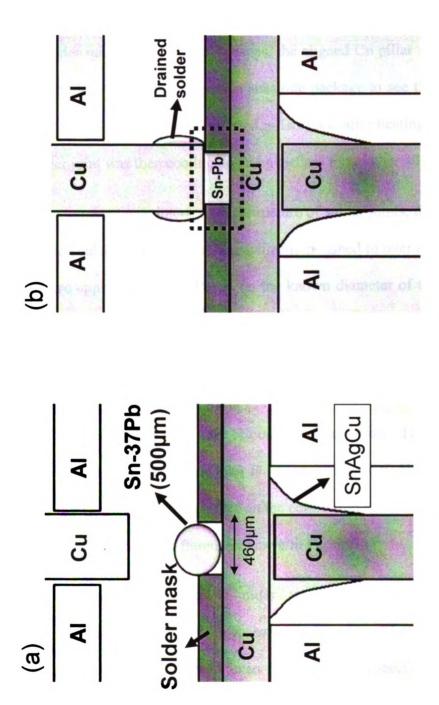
Schematics drawing showing the fabrication of the solder joint. Before soldering (a), and after soldering (b).
